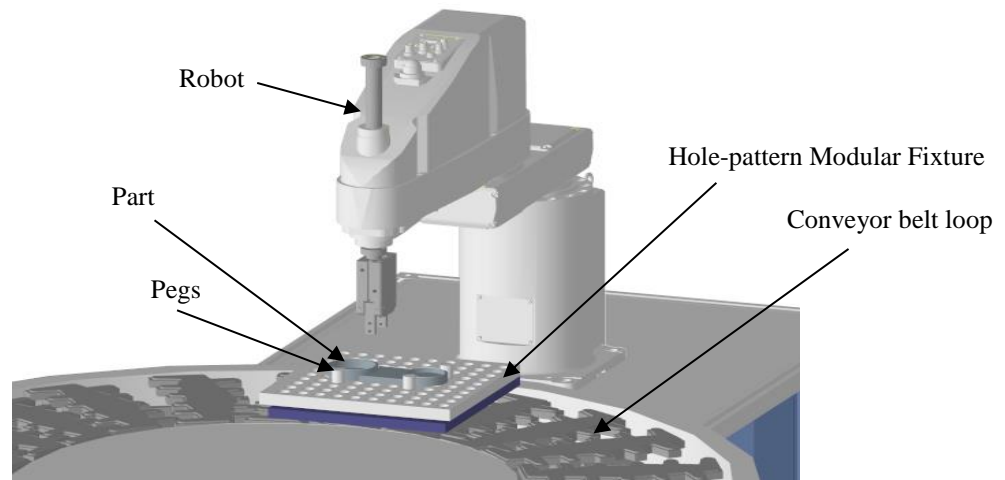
Robotic assembly station on Hold'n Go conveyor system robot
